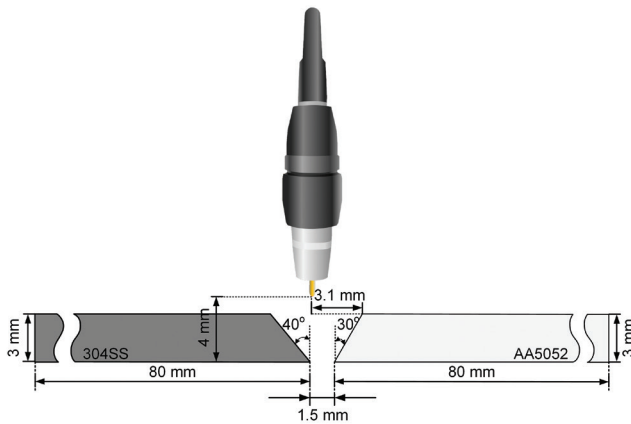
Schematic diagram of assembly before GTAW fusion-brazing.
